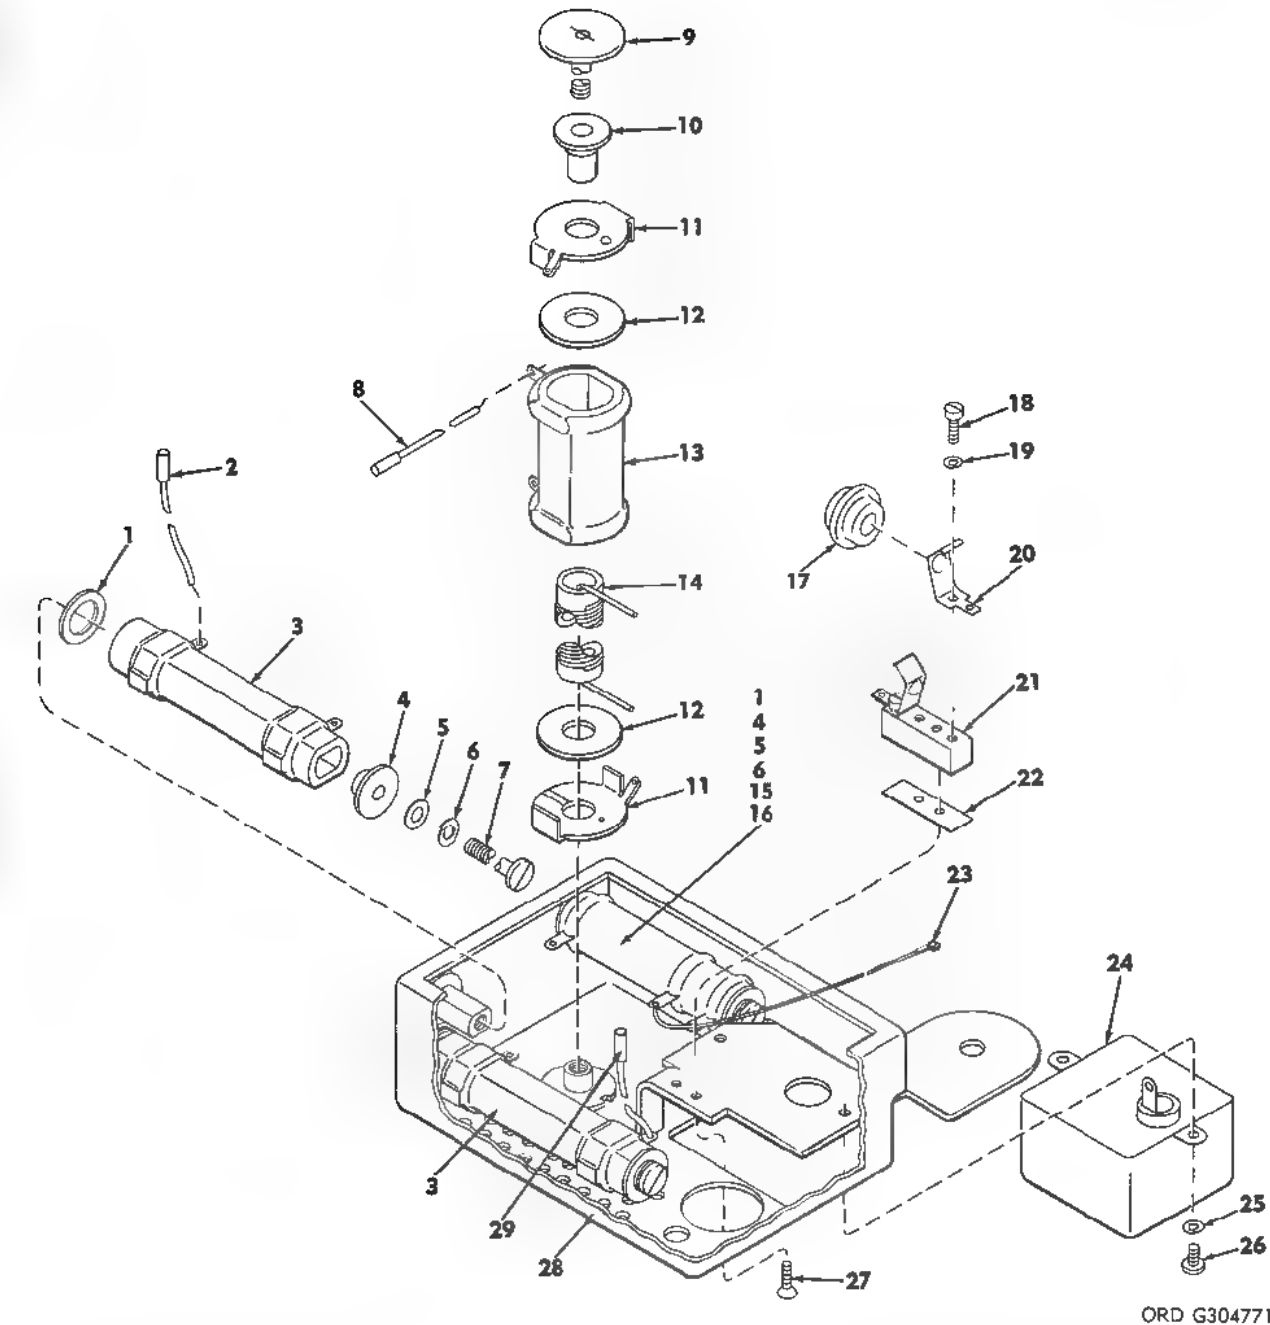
SWITCH, INTERLOCK /9136180/-PARTIAL EXPLODED VIEW
